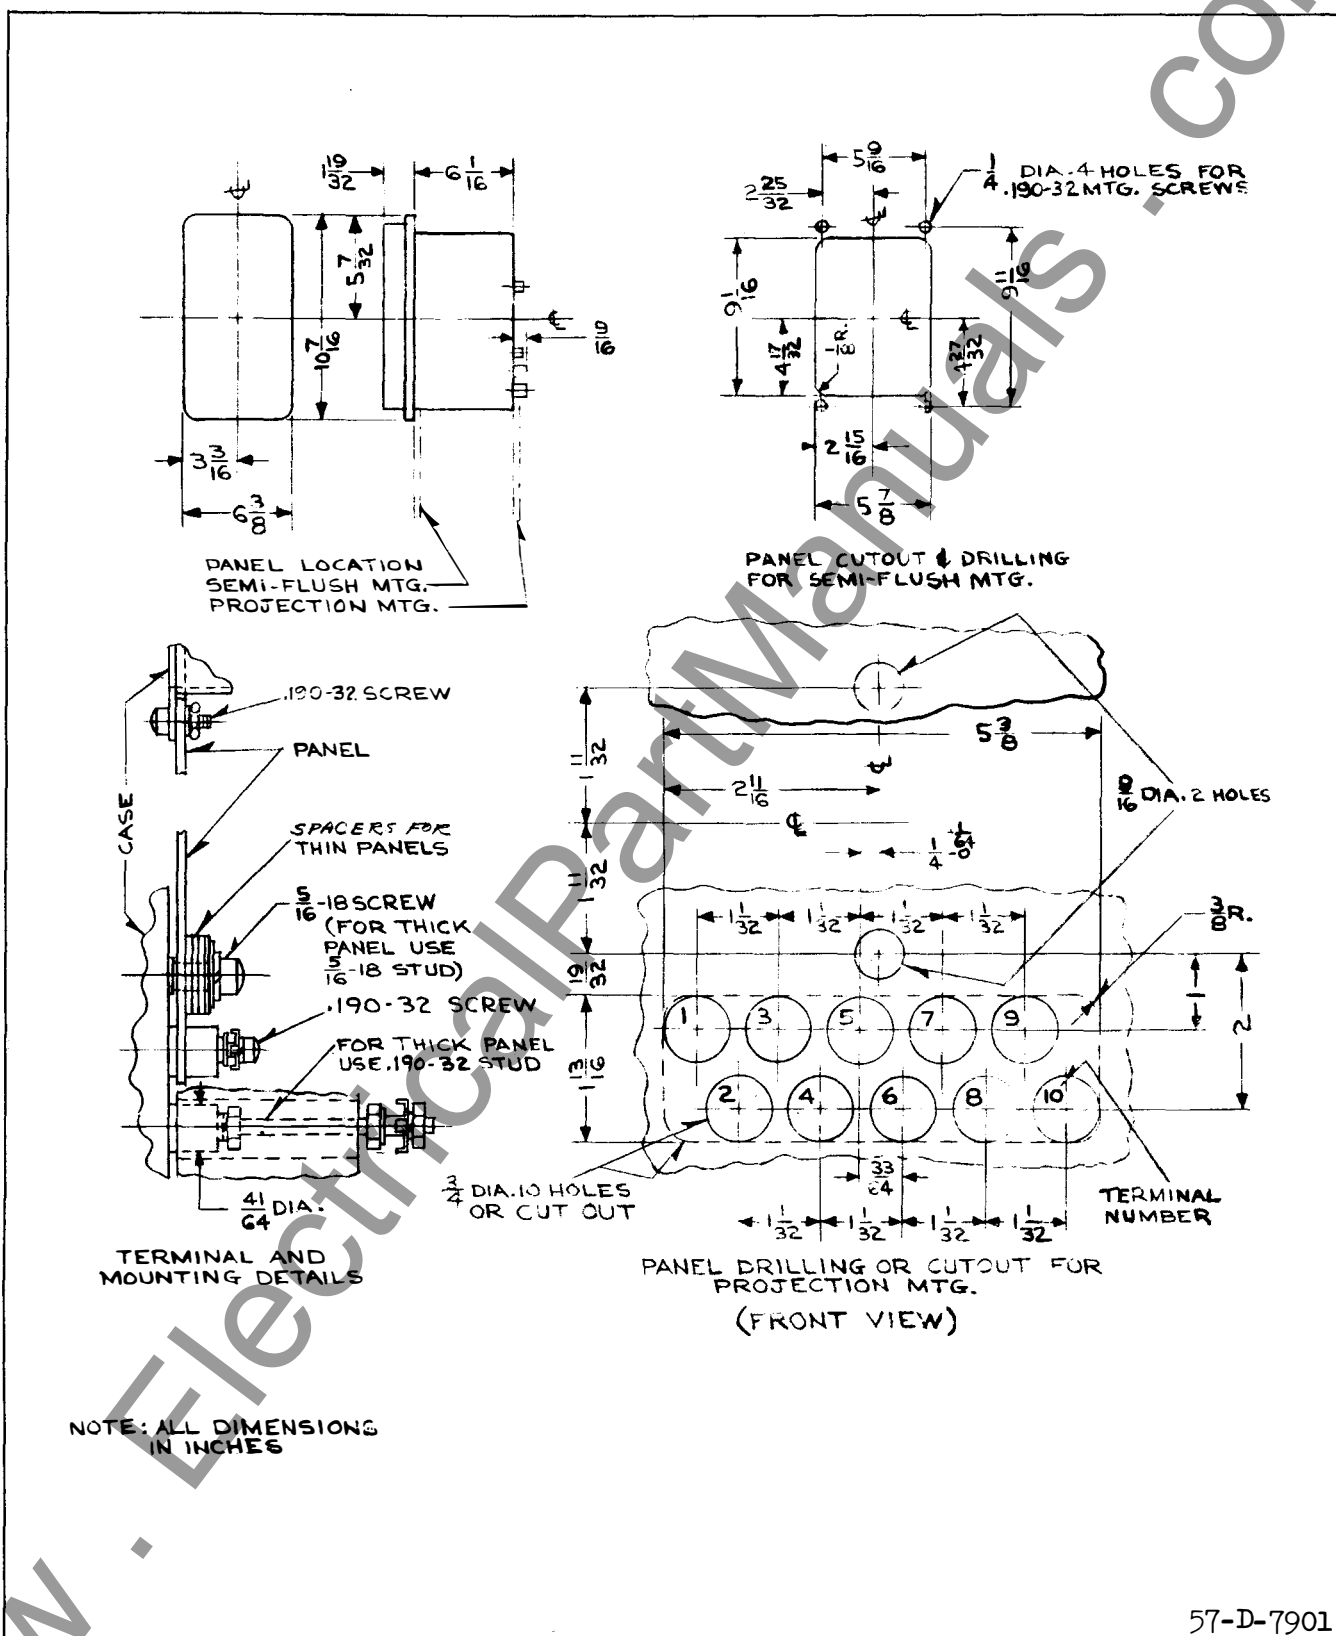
Outline and drilling for the type CA generator relay in the type FT21 Case.
